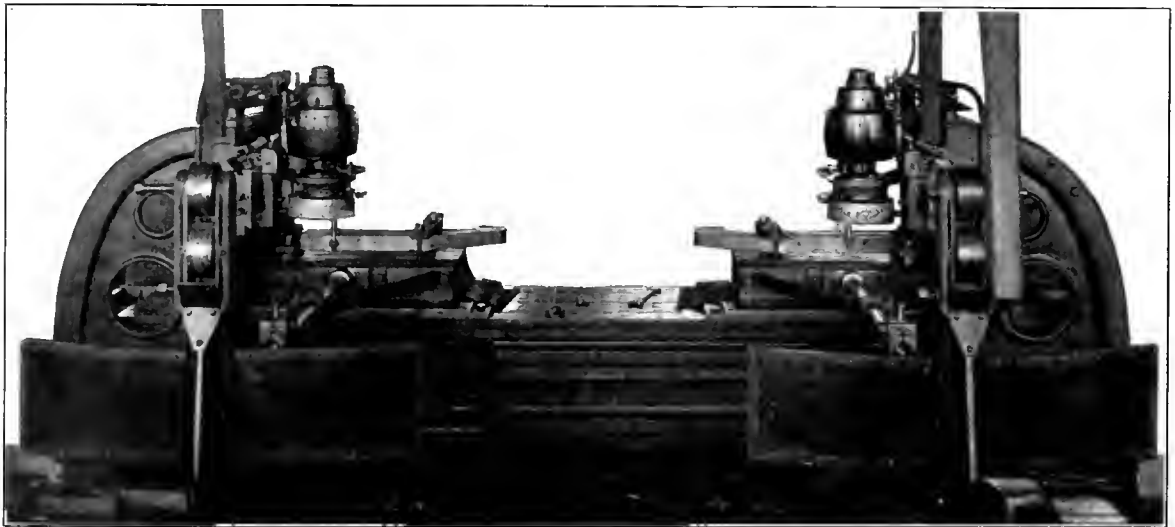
Radial Planing and Grinding Machine for Valve Motion Links and Link Blocks
